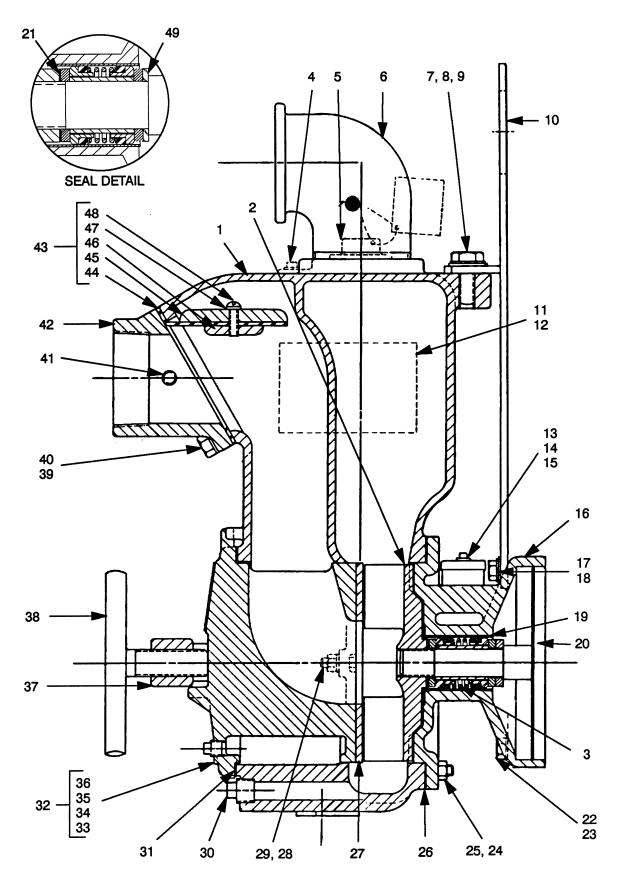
Pump End Assembly 13A2-(M12/M12 S/G)
